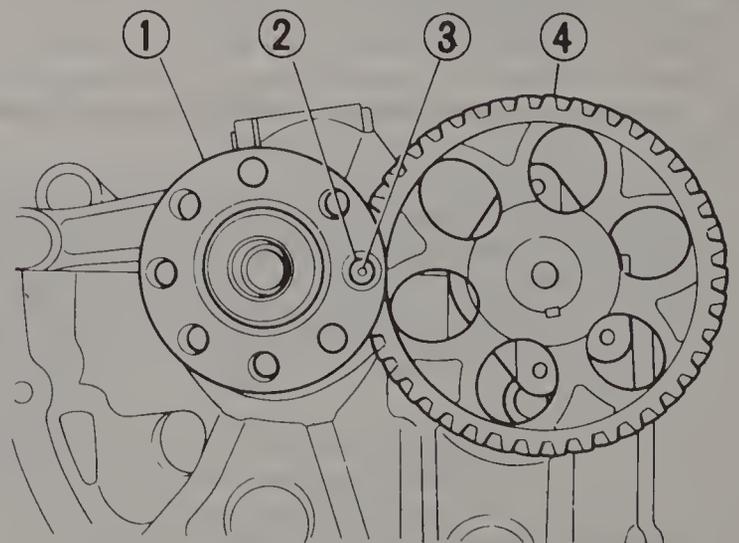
Correct camshaft gear-to-crankshaft gear mesh (Sec 29)
